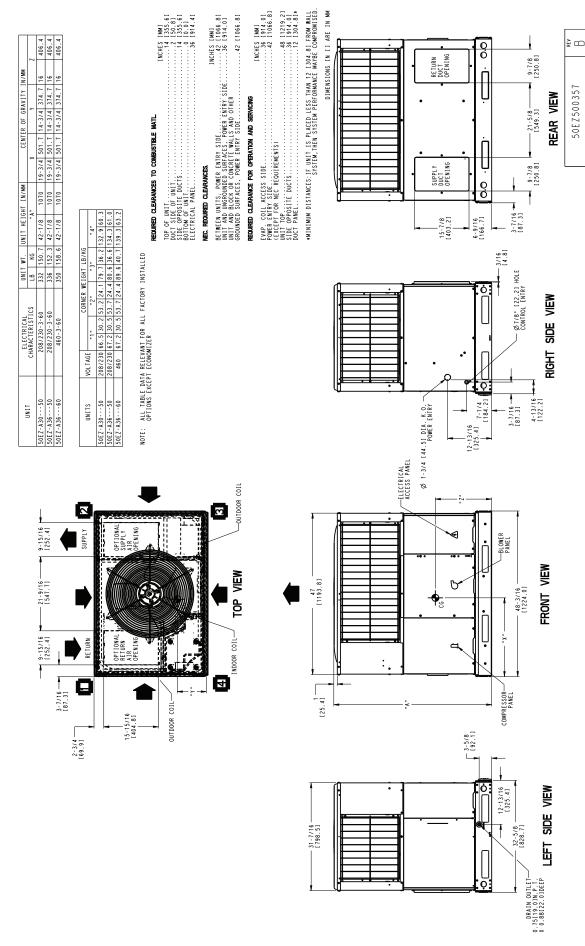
50EZ-A30-36 Unit Dimensions
